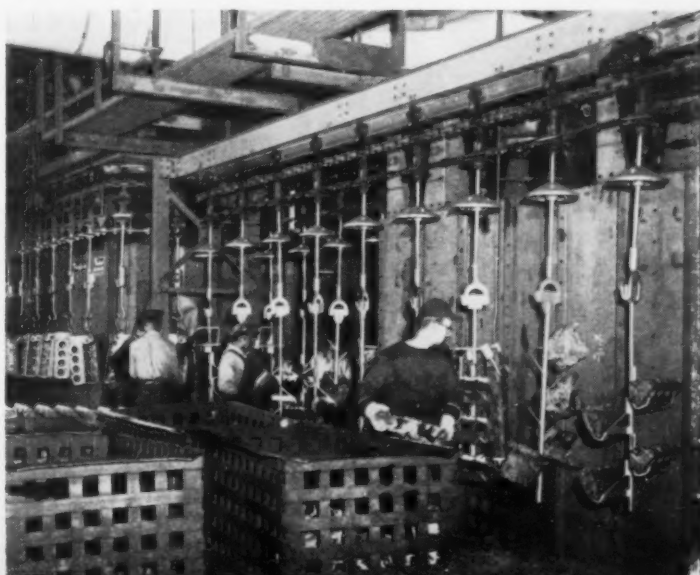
Fixtures on chain move engine blocks through second Robinson machine where additional flats are cut.
